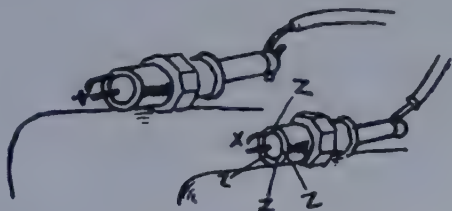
To test your spark plug lay it on the cylinder. Crank Engine until coil buzzes. If plug sparks at "X" it is O. K. If at "Z" it is defective or "short circuited."
